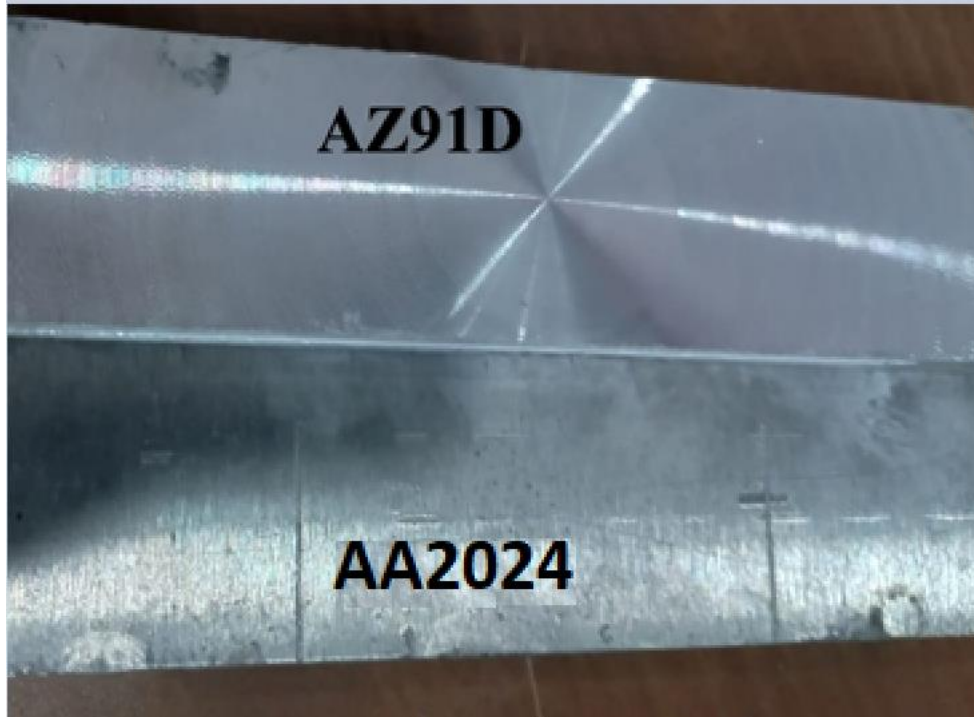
Base plate AZ91D and AA2024 before welding
